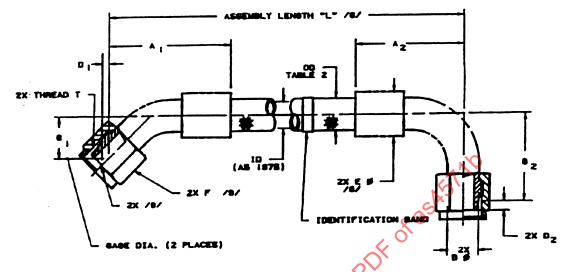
HOSE ASSEMBLY, 45° ELBOW TO 90° ELBOW
